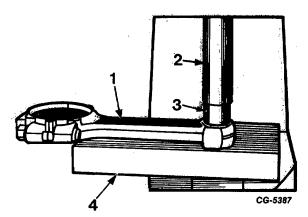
Using SE-2539 Tool to Remove Worn Connecting Rod Bushing
